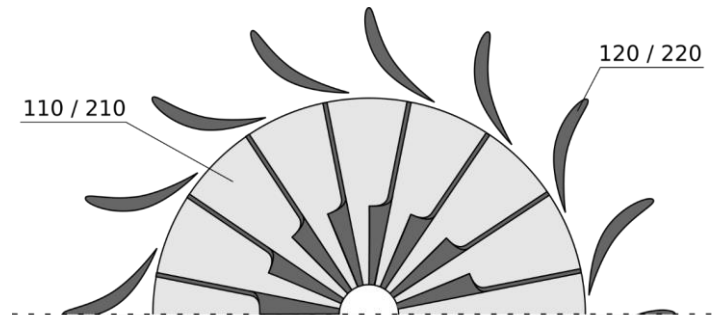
PERSPECTIVE OF THE NEW TWIN-ROTOR TURBINE WITH SPIRAL CASING NOZZLE/DIFFUSER.
